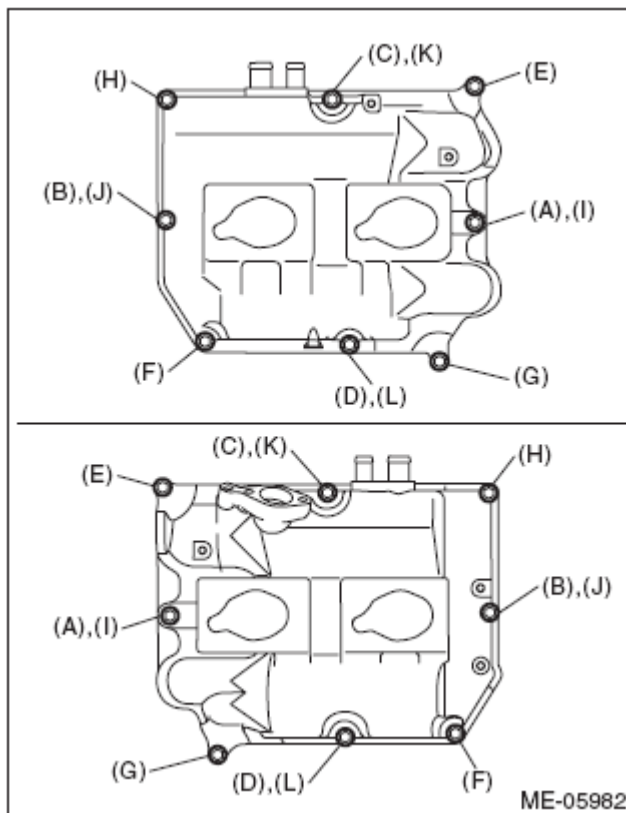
Identifying Tightening Sequence Of Rocker Cover Bolts
